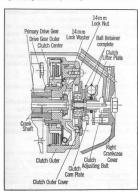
ST 50-70-CT 70 CT 70, K1, K2, K3 Clutch assembly
